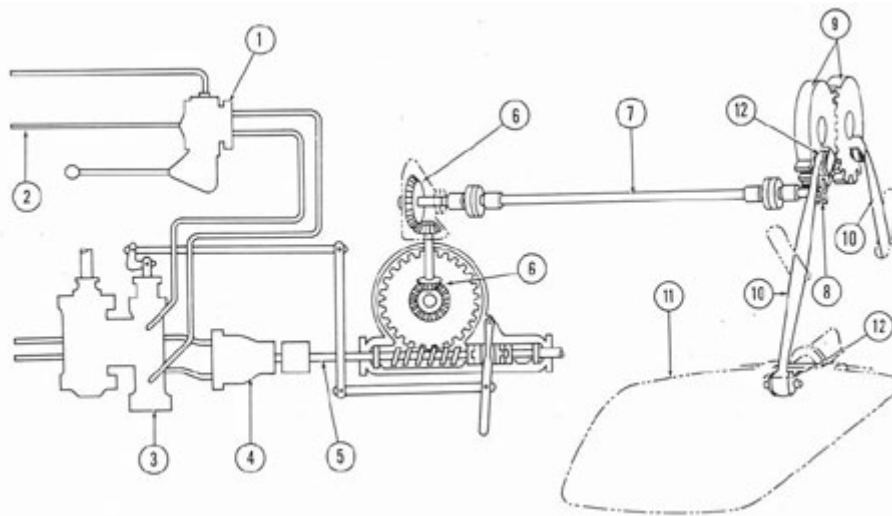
Bow plane rigging system. 1) Rigging control valve; 2) after service line; 3) change valve; 4) Waterbury B-end motor; 5) shaft; 6) bevel gear boxes; 7) horizontal shaft; 8) spur gear; 9) sector gear; 10) connecting rods; 11) diving planes; 12) ball-and-socket joint.
